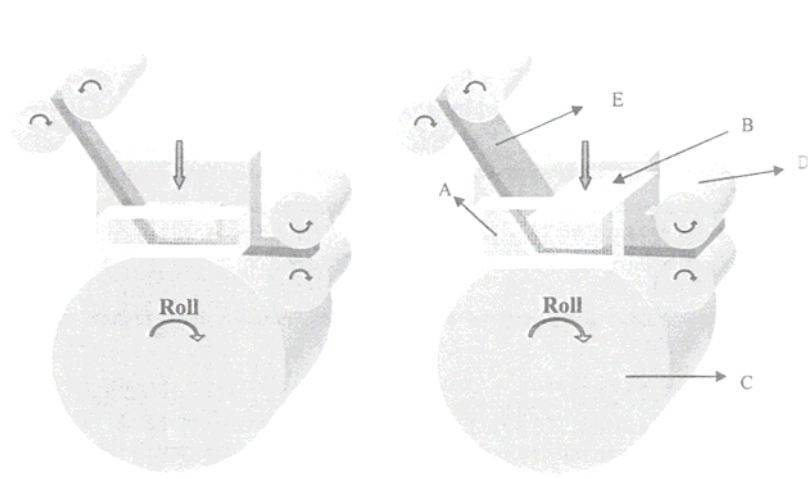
Sketch of the single roll drive equal channel angular process for a) processing billets and b) processing sheets [63].
